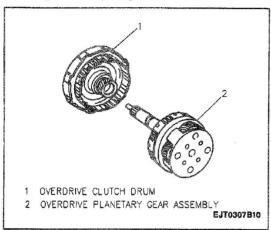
Removing Overdrive Clutch Drum from Overdrive Planetary Gear
